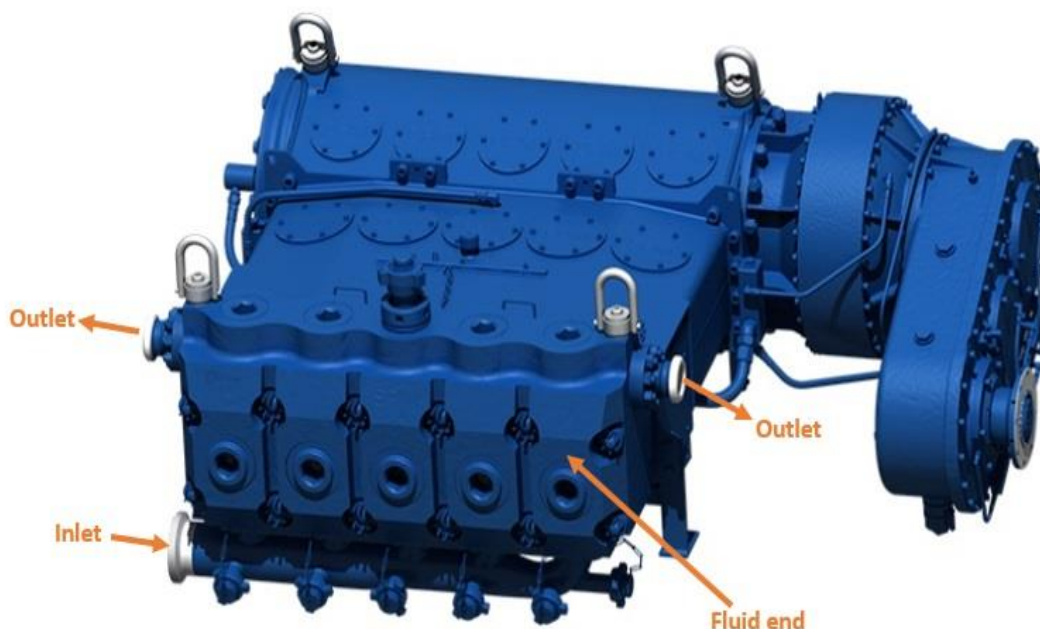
WSPM Destiny QWS 2800 hydraulic fracturing pump (courtesy of WSPM)
